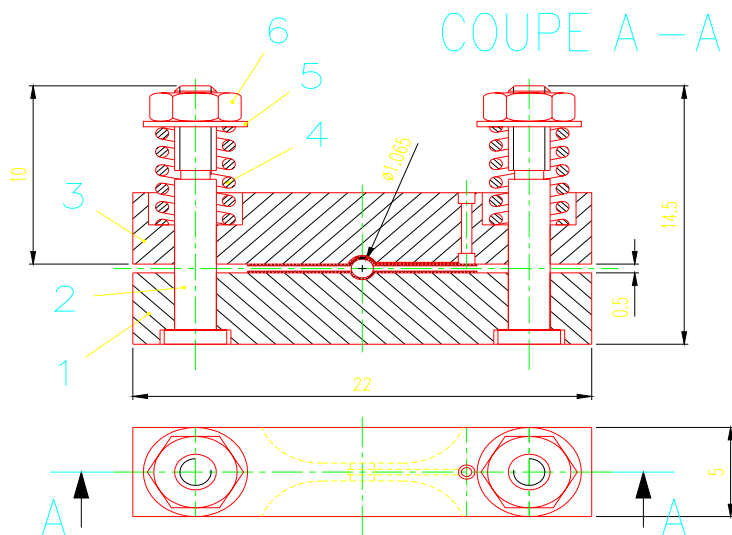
Clamp heater, side and top view, 1 lower part, 3 upper part, 4 spring, measures in mm
